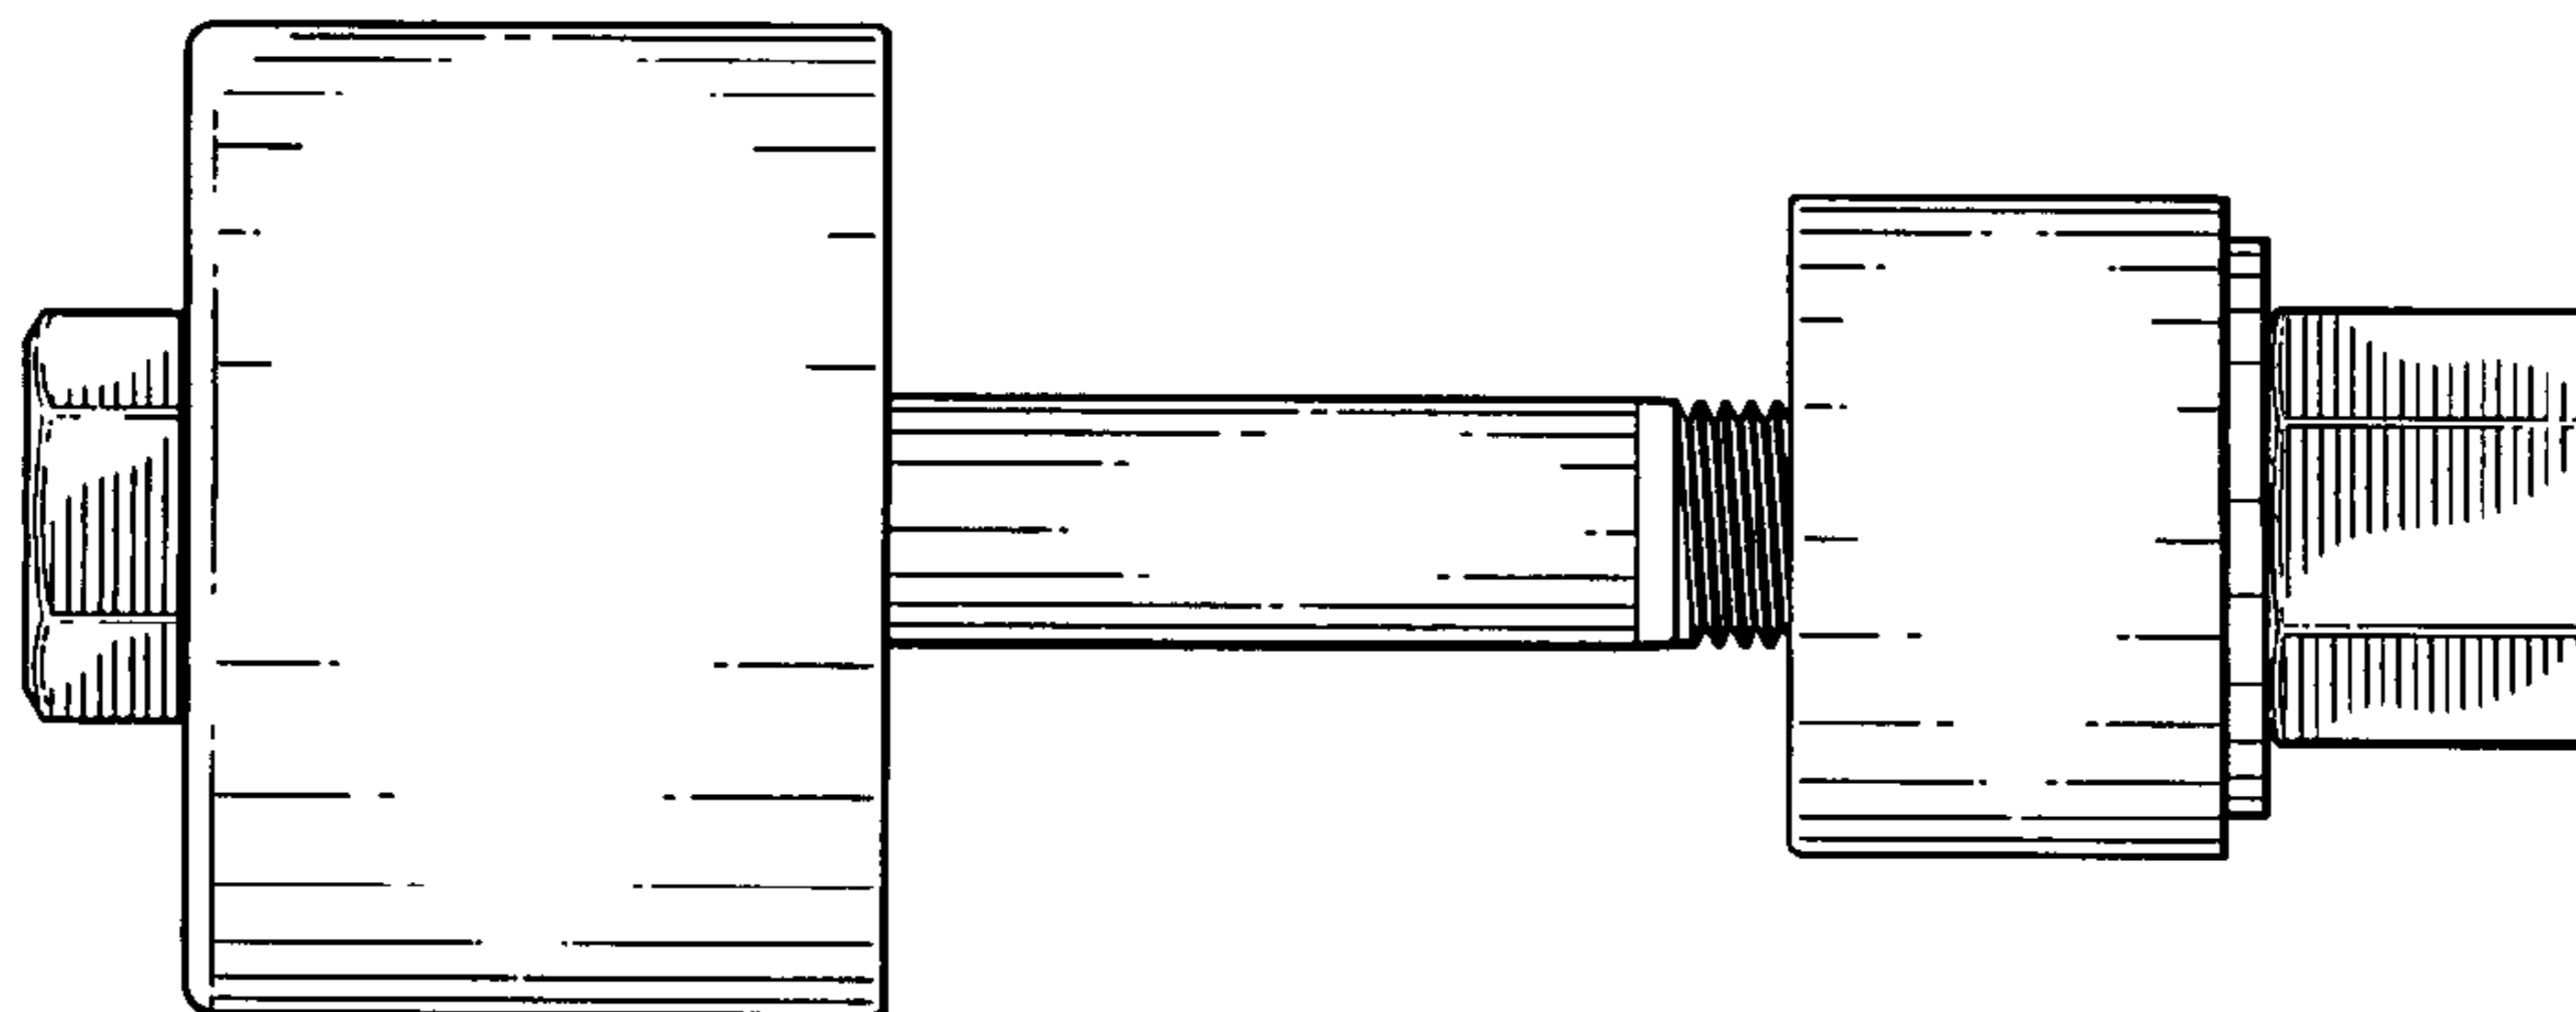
is a full side view of a suspension module wheel puller for suspension assemblies showing a left end cup, a right end follower and a threaded bolt therethrough with a fastening nut on the right end;
